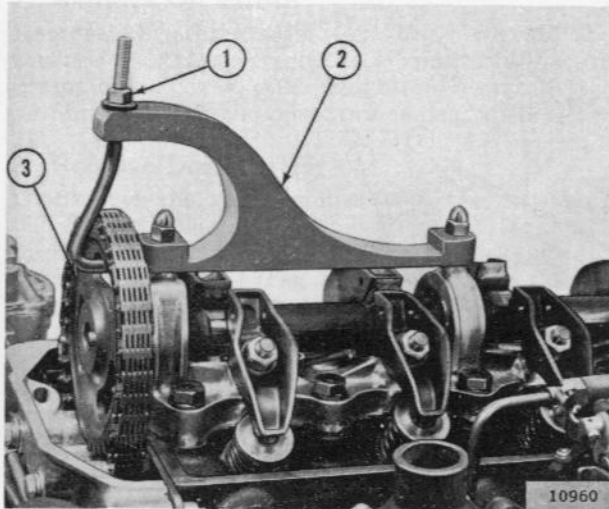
CAMSHAFT SPROCKET REMOVAL AND INSTALLATION TOOL INSTALLED ON ENGINE
